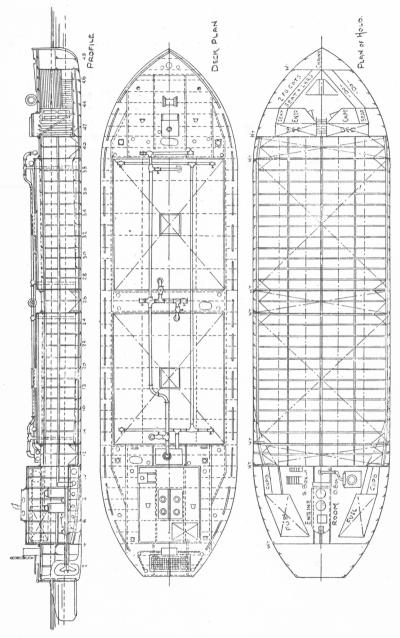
Construction Plan of Barge for Carrying Oil in Bulk,
